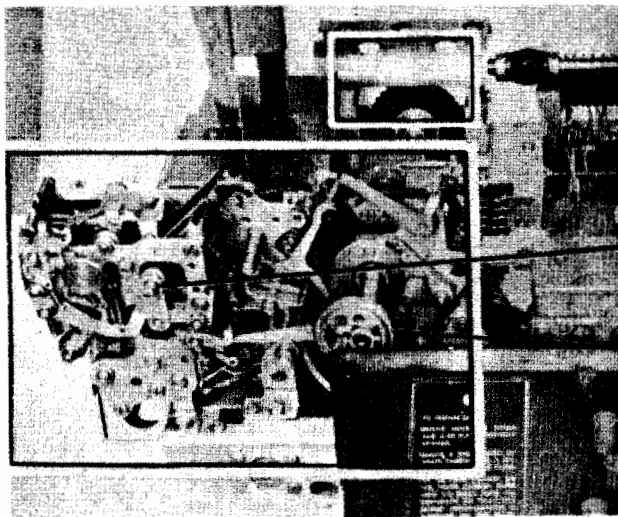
Rocker Bail Mechanism (Typing Perforator Only), Rear View
